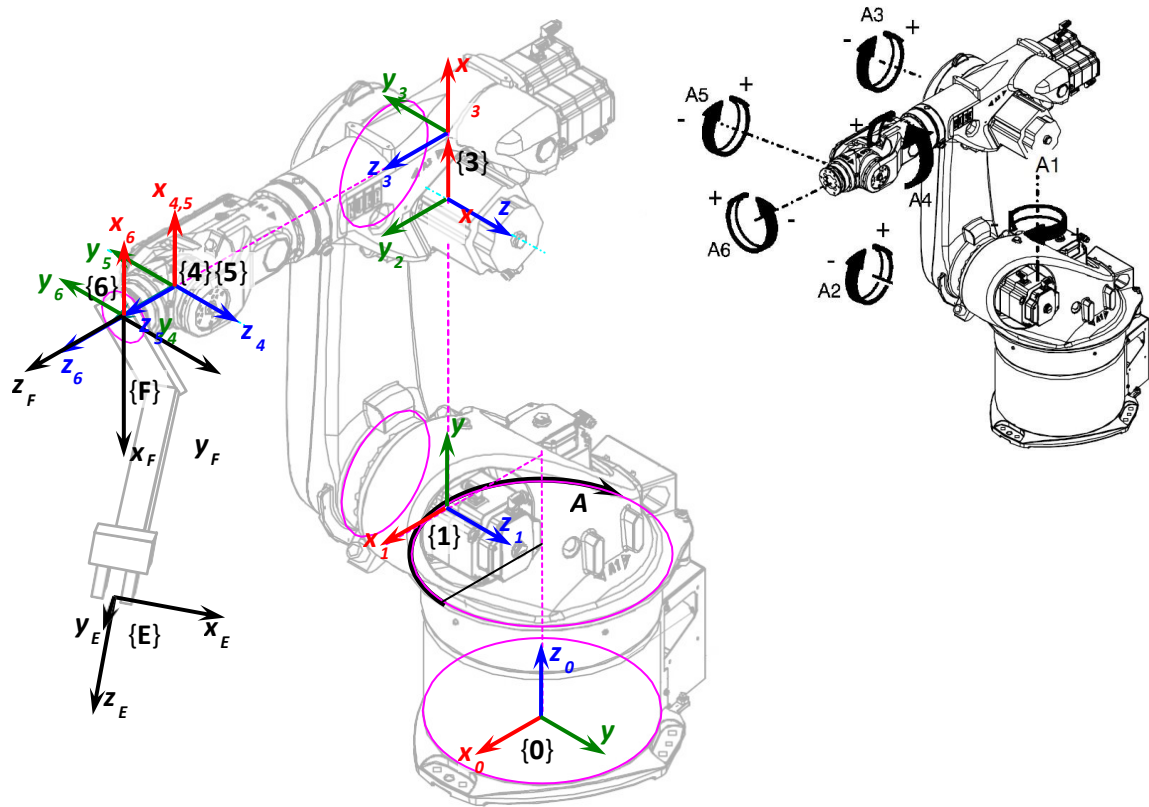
ISO view with 3D frames and anomalies: Axis 1 angle, Flange-frame
